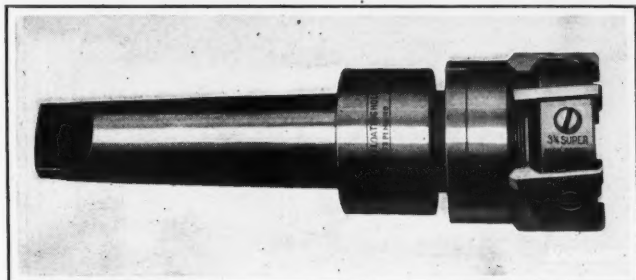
Floating Holder made by the McCrosky Tool Corporation
